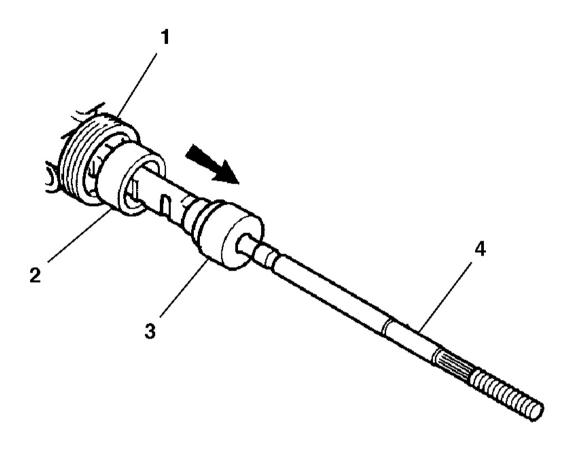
Shock Dampener & Inner Tie Rod Housing Courtesy of GENERAL MOTORS CORP.
